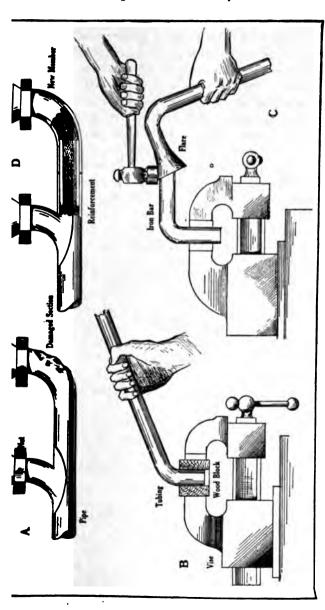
Illustrating Procedure in Bepairing Damaged Water Manifold.
